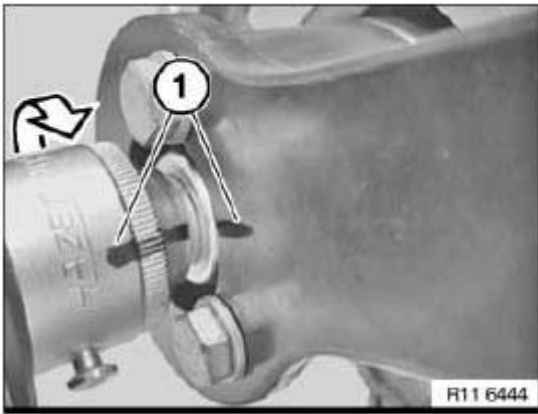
Identifying Stroke Of Paint For Torsion Angle Tightening
